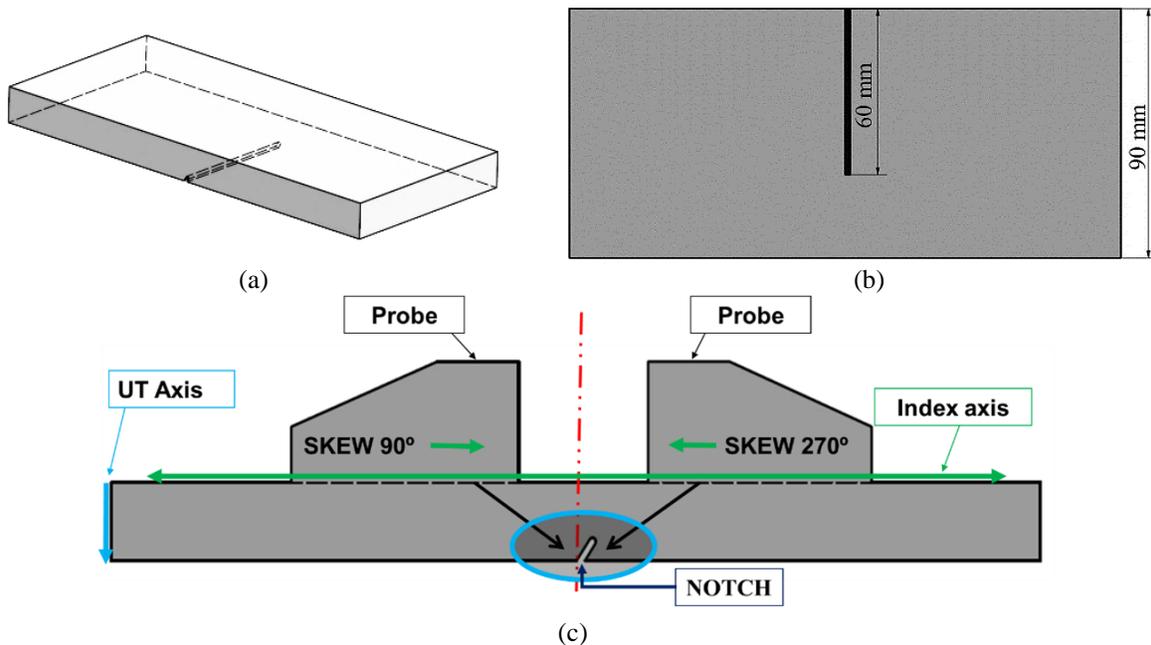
Schematic of the mechanized samples. (a) three-dimensional view. (b) Top view with dimensions in mm. (c) probe locations on inclined notches. Source: own elaboration.
